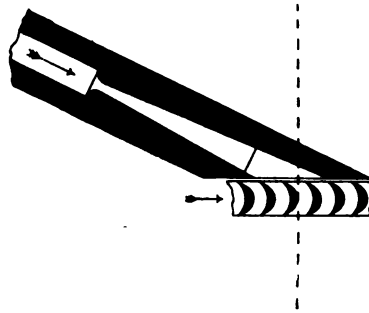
A.—Section of Nozzle of De Laval Steam Turbine.
